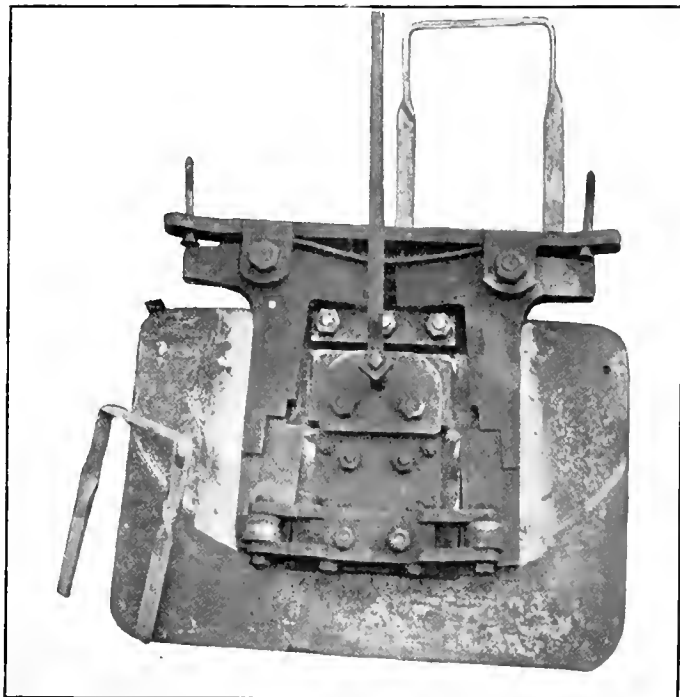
DIES FOR MAKING FREIGHT CAR STEPS.
